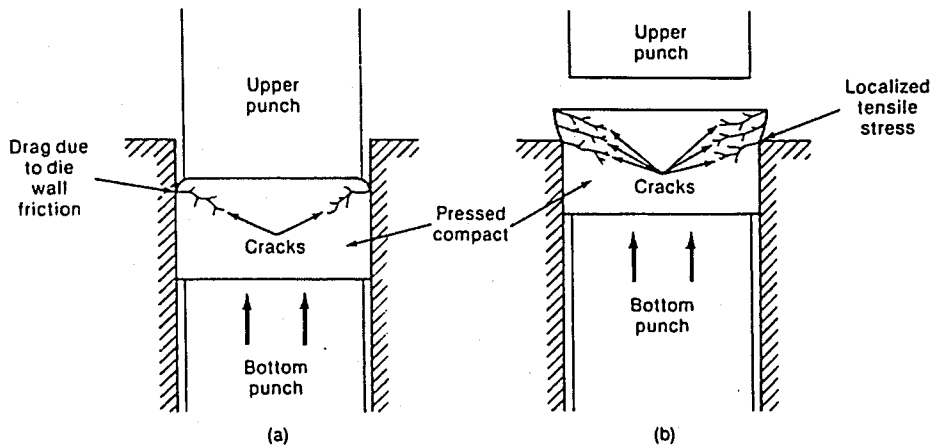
Mechanism of formation of laminar cracks in uniaxially pressed parts.
